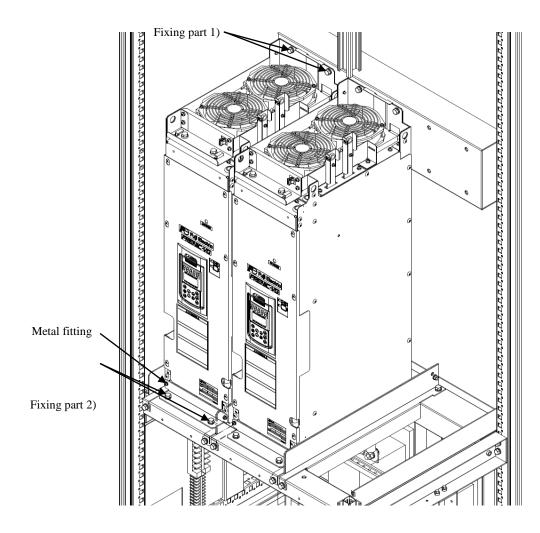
The stack mounting method of Rank 2 size (55 to 110 kW)
